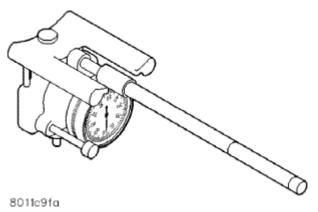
Indicator Cylinder Bore C-119 Courtesy of CHRYSLER LLC
